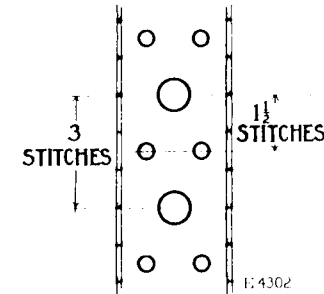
Diagram Showing Correct Number of Stitches Between Holes in Three Hole Perforating Design Made on Machines 22w71 and 22w72
